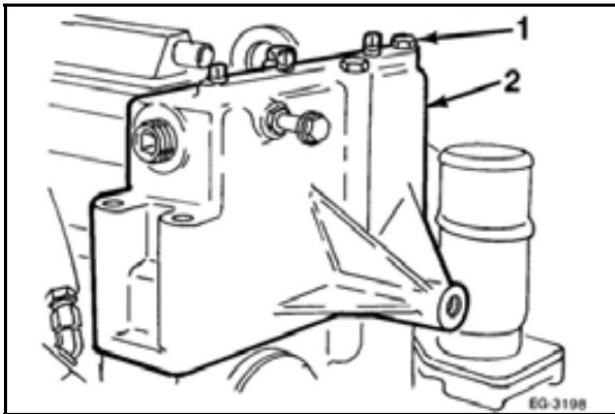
Removing Mounting Bolts From the High-pressure Oil Pump Reservoir
